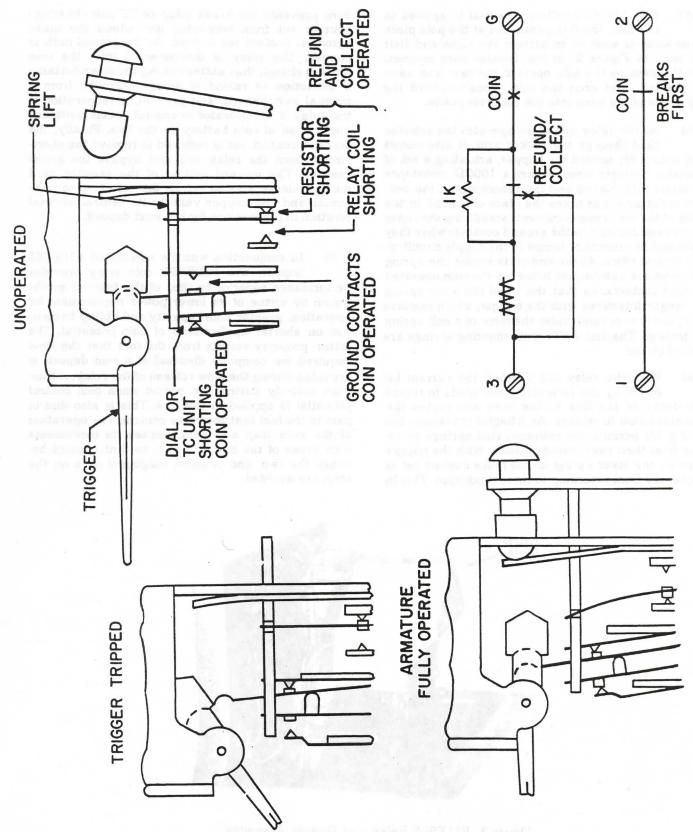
Coin Relay Contact Spring Assembly and Schematic.
